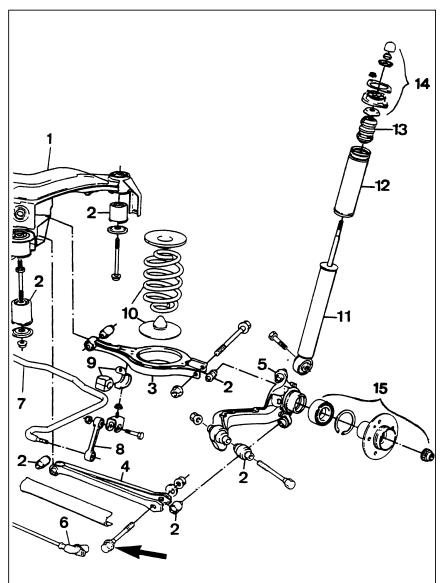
Components of the rear suspension: 1 Rear axle member - 2 Flexible supports (silentblocs) - 3 Upper transverse control arm - 4 Lower transverse control arm - 5 Swivel arm (trailing arm) - 6 Wheel speed sensor - 7 Anti-roll bar - 8 Swivel linkage - 9 Anti-roll bar mount - 10 Coil spring and plates - 11 Shock absorber - 12 Protective sleeve - 13 Rubber stop - 14 Upper shock absorber fastenings - 15 Wheel flange and bearing - Arrow = camber adjustment screw.
